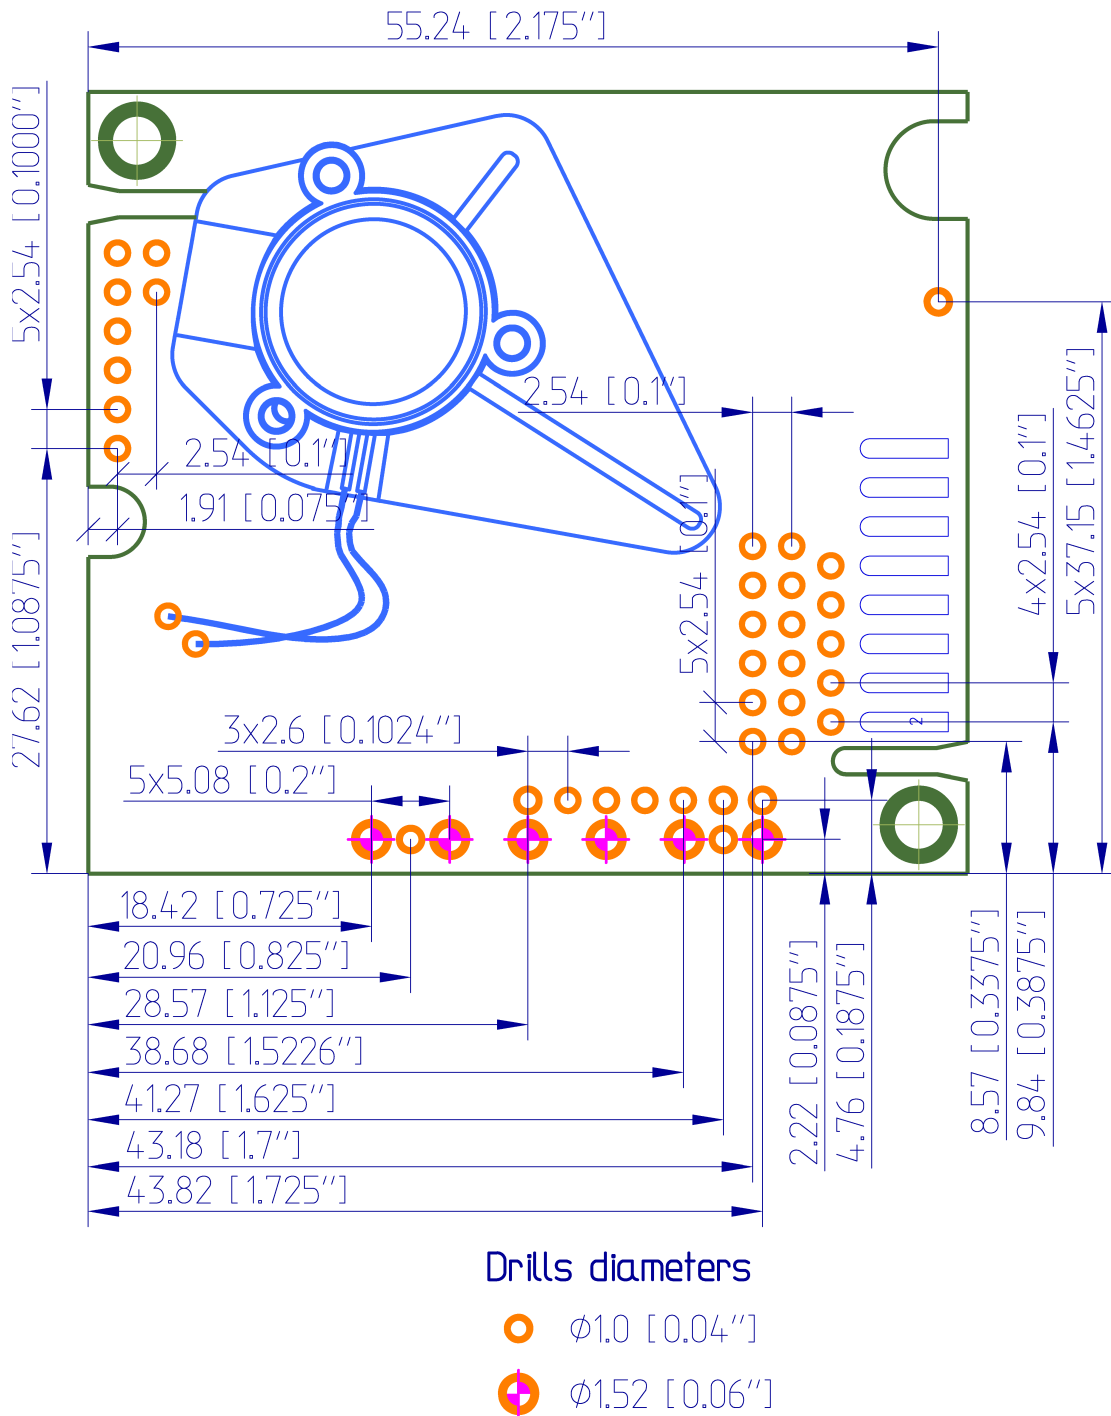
CO<sub>2</sub>Engine™ ICB mechanical drawing. Hole/contacts positions.
